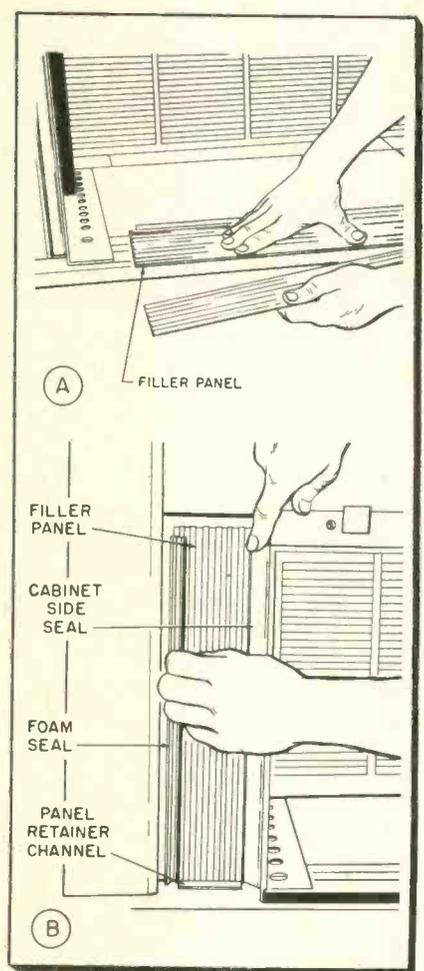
(A)—Filler panel is broken on scored edge against a flat surface. (B)—Cut panel edge is inserted into the rubber side seal groove by flexing the beaded lip of the rubber seal.
